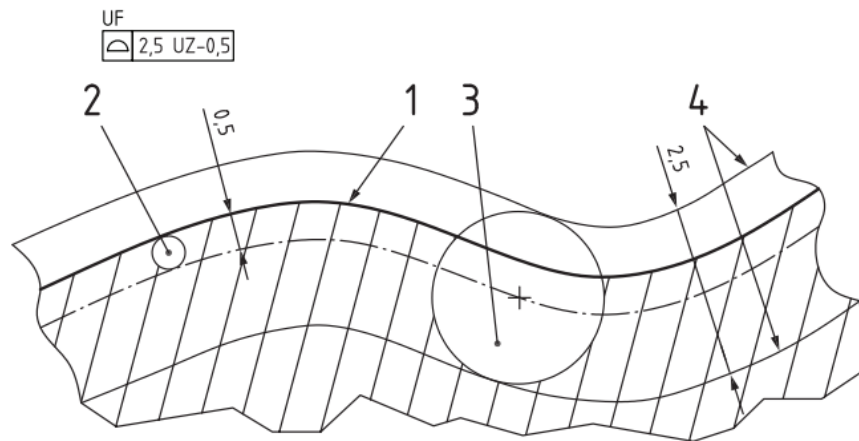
Calculation of casting nominal dimensions from machining nominal dimensions. [17]
